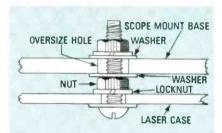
DETAIL FOR THE RECEIVER mounting plate. An oversize hole mounting base allows coarse adjustment of the scope assembly. Use an oversize washer on both sides of the hole, and a lockwasher at the laser's case.
